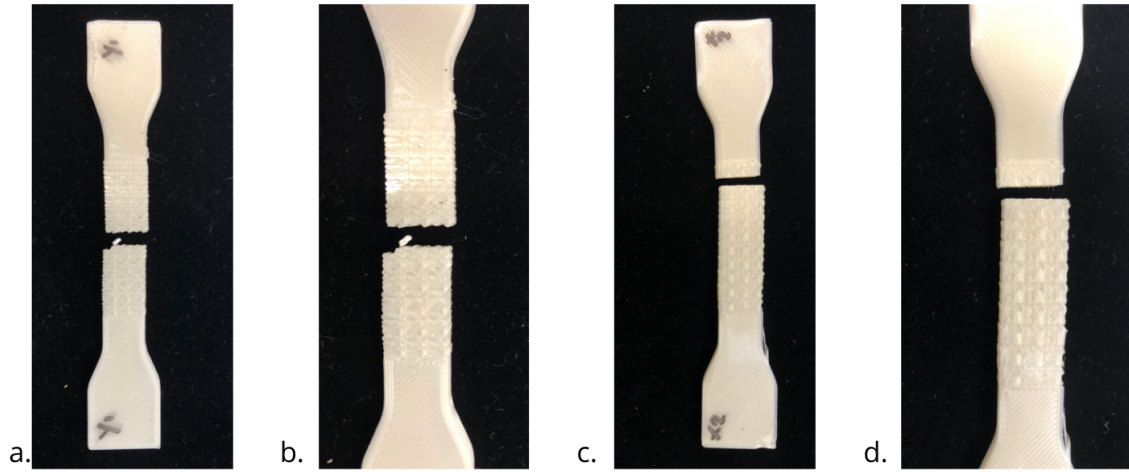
2 specimen after tensile testing. a-b) specimen Y_1 after tensile testing and a detailed image showing the partial fracture through the RVE. c-d) Specimen X_2 after tensile testing and a detailed image showing a clean cut between the RVEs.
